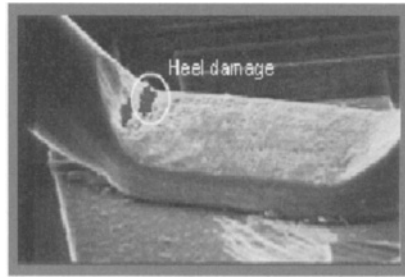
Micro-cracks in the heel [Courtesy: Gaiser Tool]
